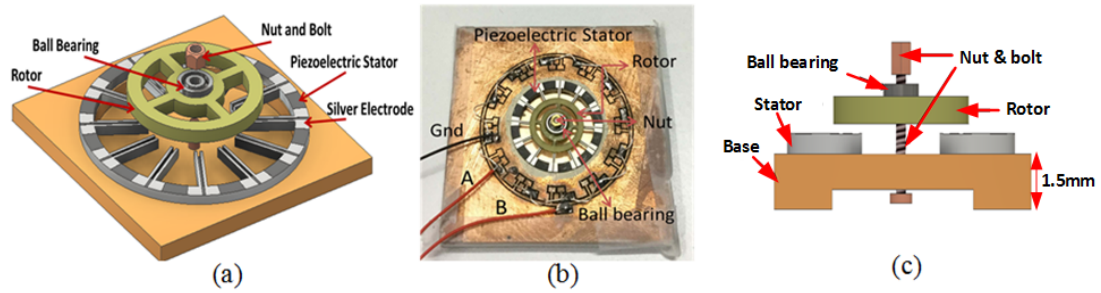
(a) 3D sketch of the motor (b) Photograph of the assembled ultrasonic piezoelectric motor (c) Sketch of the cross section of the prototype.
